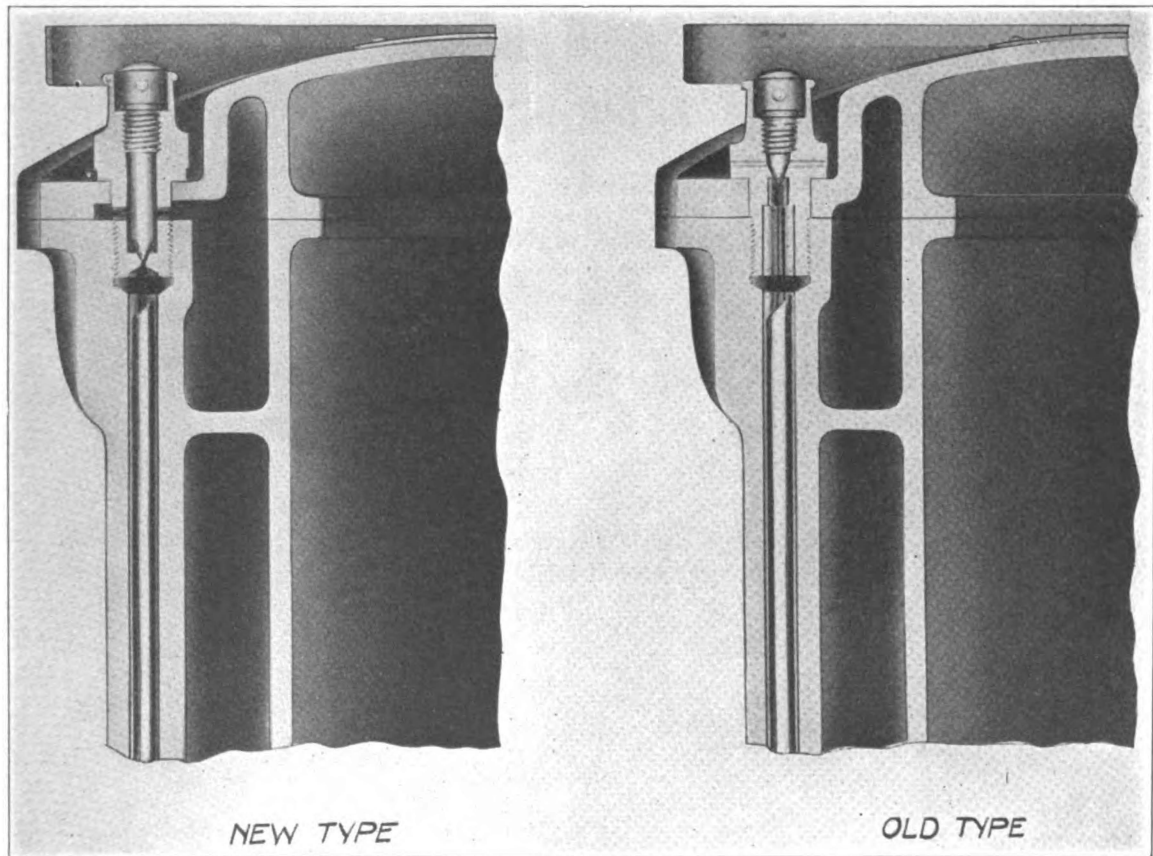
New and old type idling adjustment for Stromberg NA-L5 inverted type airplane carburetors.
